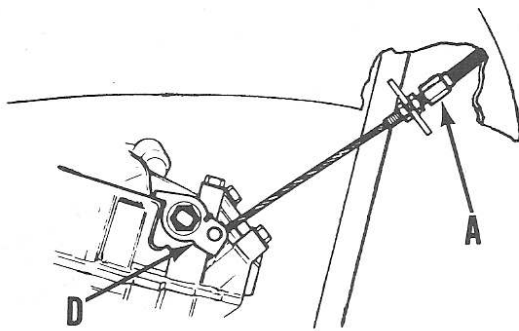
Decompression lever (D) should just contact cylinder head cover when engaged. Adjust cable at (A).
